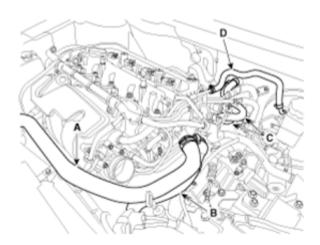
Identifying Radiator Upper/Lower Hoses, Heater Hoses, & Brake Booster Vacuum Hose Courtesy of KIA MOTORS AMERICA, INC.
